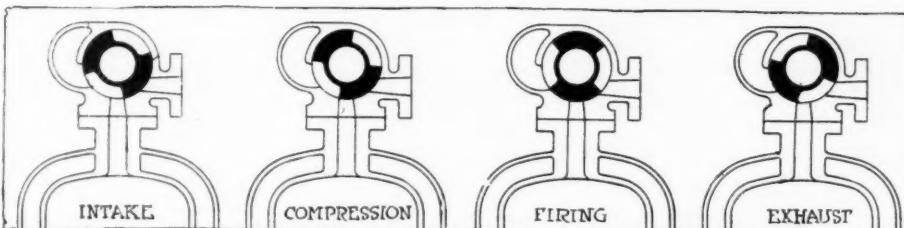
Positions of the rotary valve for intake, compression, firing and exhaust
